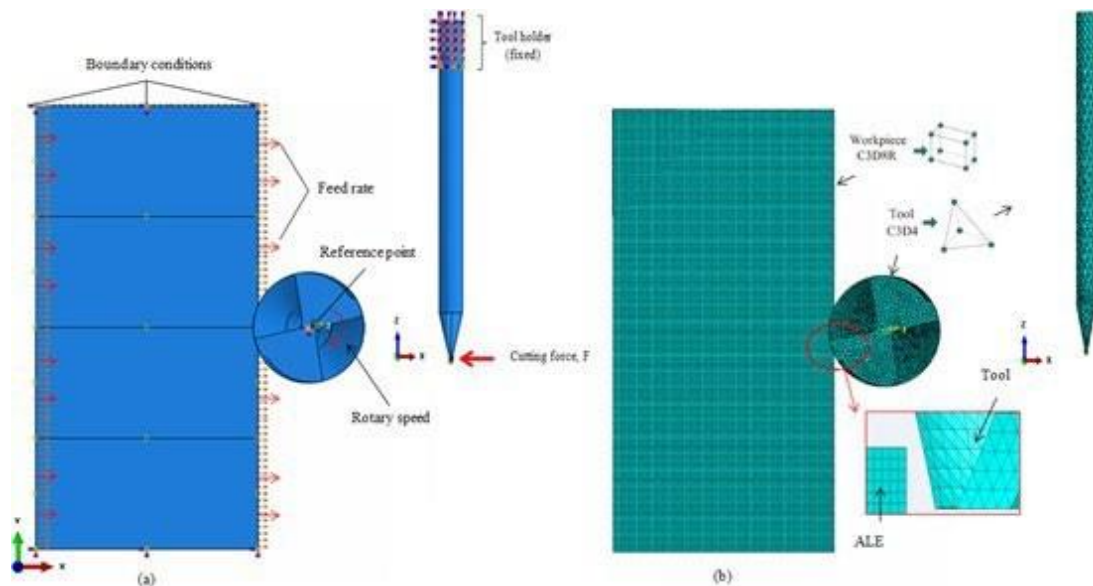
Top view of FEM setting (a) boundary conditions and (b) meshing of the workpiece and tool
